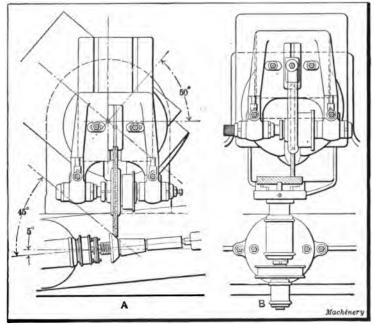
(▲) Grinding a Double Taper by Traversing both Platen and Wheel Slide. (B) Grinding the Side of a Disk
